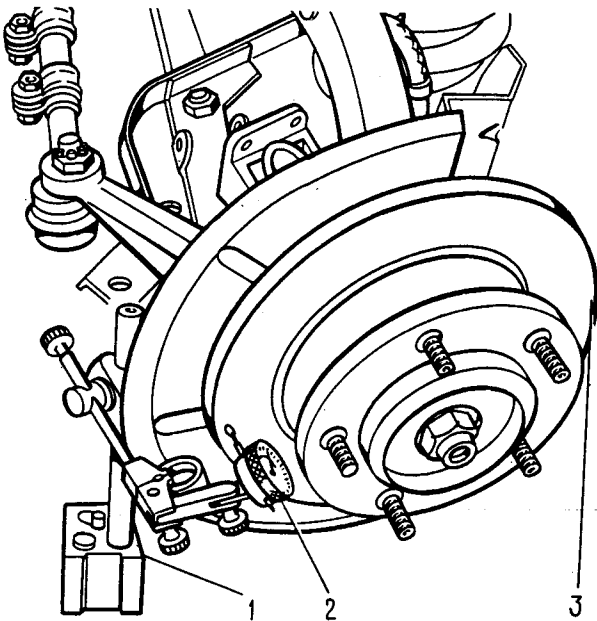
Checking Brake Disc for Face Runout: 1 - magnetic support; 2 - indicator; 3 - brake disc
